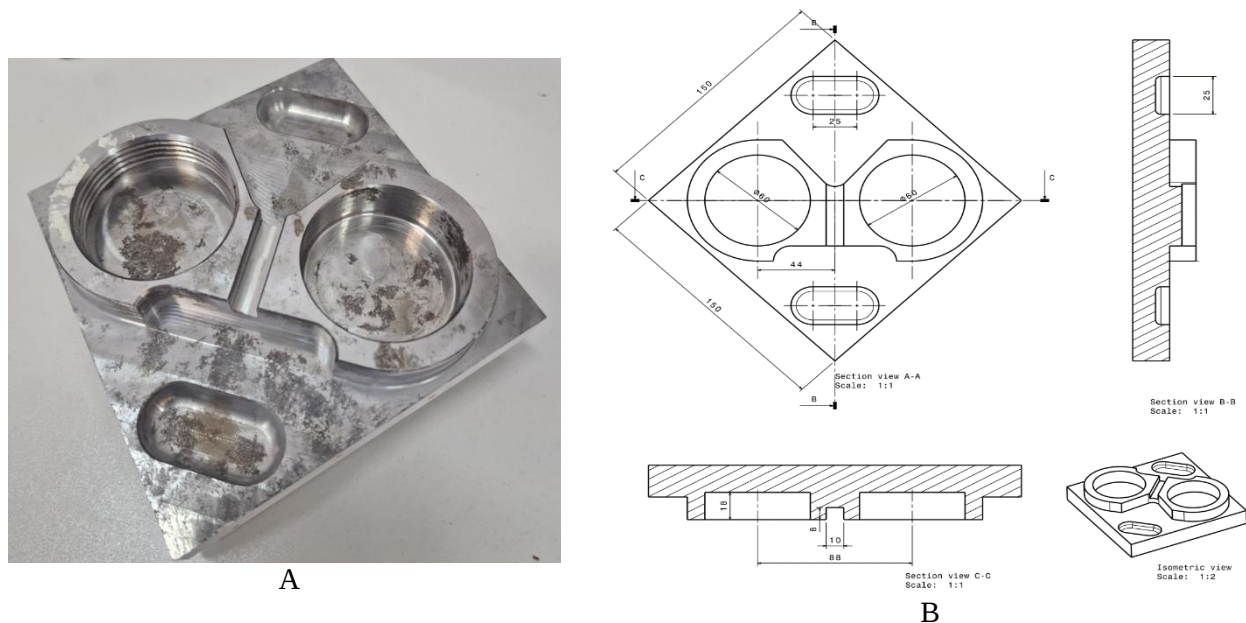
A - The physical test specimen (plate) B - Technical execution drawing of the specimen with nominal dimensions
